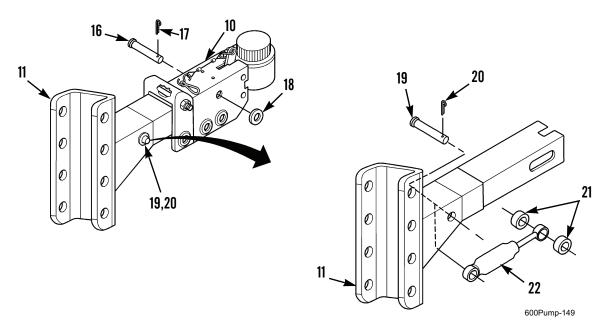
Actuator Bracket and Damper Inside Actuator Housing.
